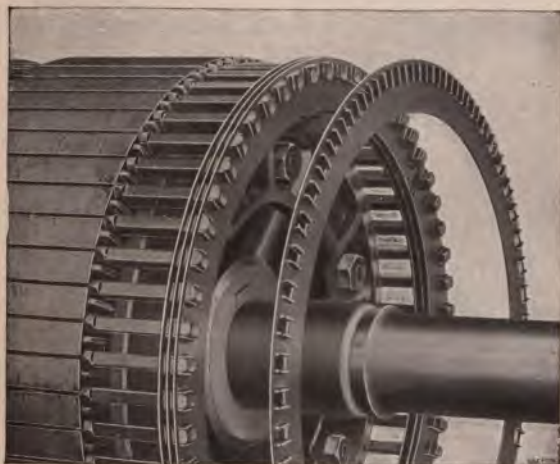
View of End Rings and Bars of a Squirrel-cage Rotor, to Show the Style of Winding. General Electric Co.
